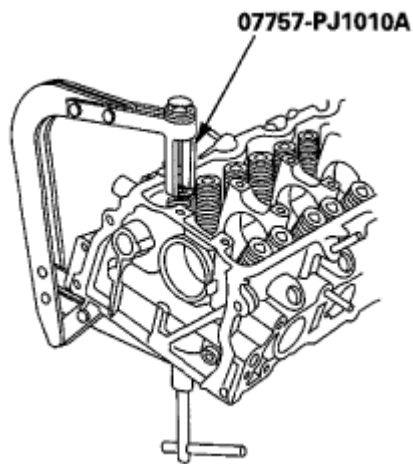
Compressing Valve Spring, And Remove Valve Cotters
